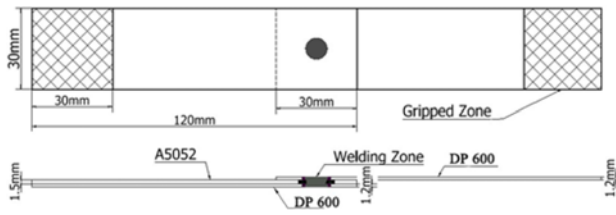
Schematic diagram for tensile-shear testing of welded joint
